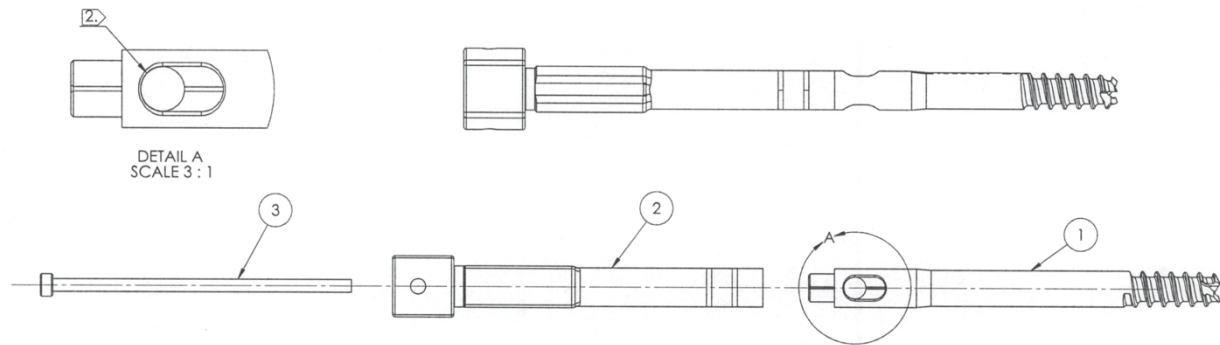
Manufacturing schematic for assembly of dynamic prototype device and nail guide.
